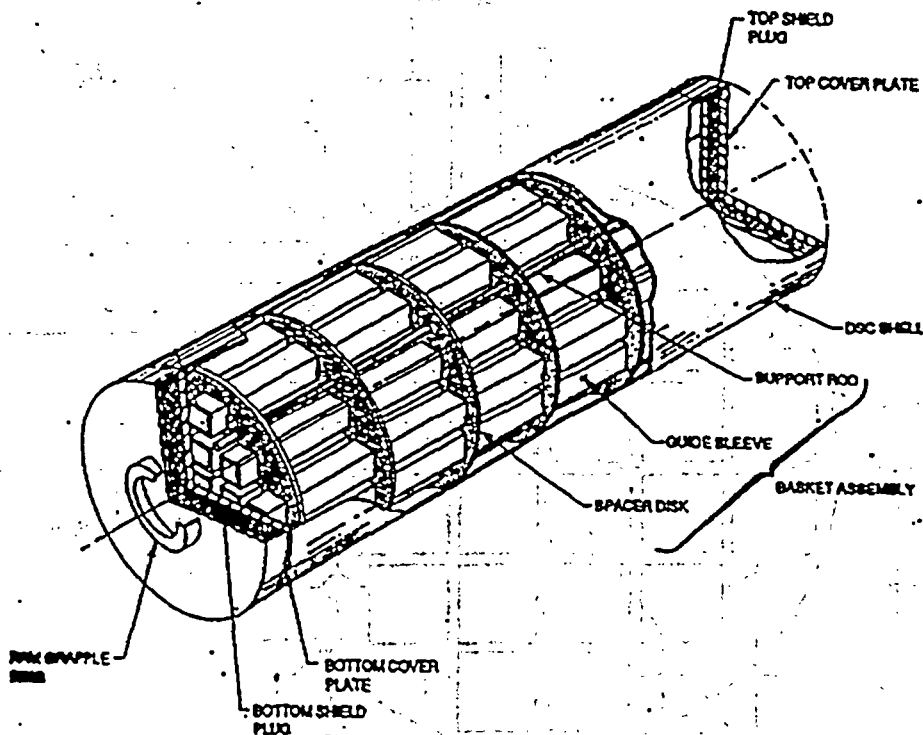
DSC BASKET ASSEMBLY [6]
